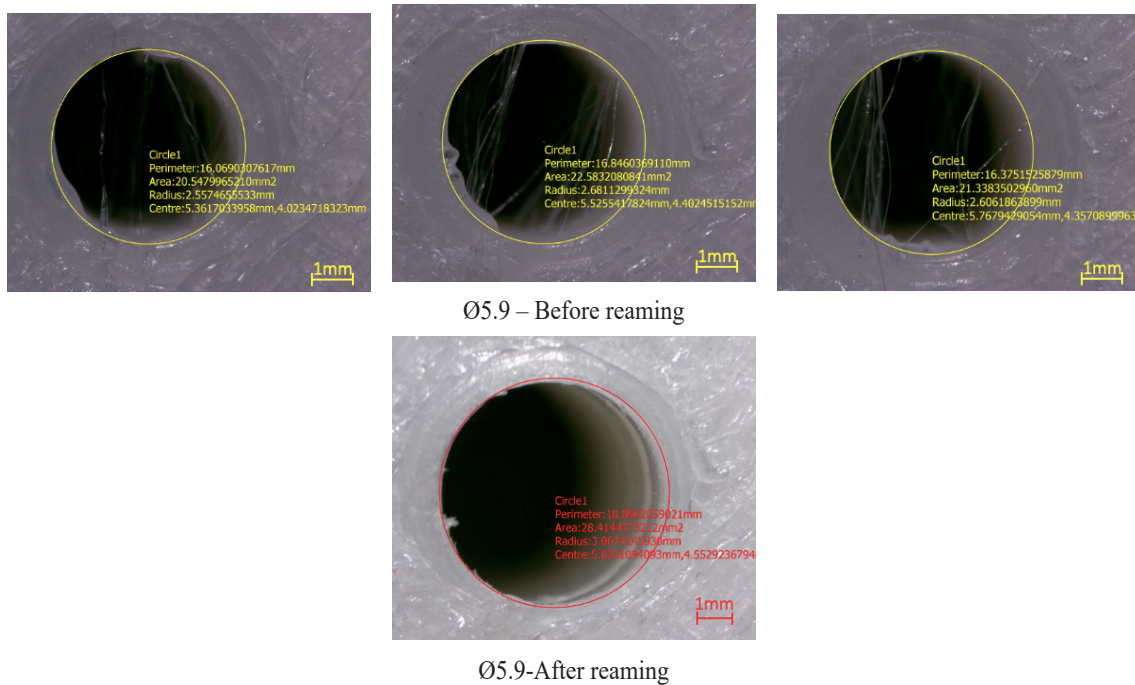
Sizes of 5.9 mm diameter holes produced by 3D printers before and after reaming
